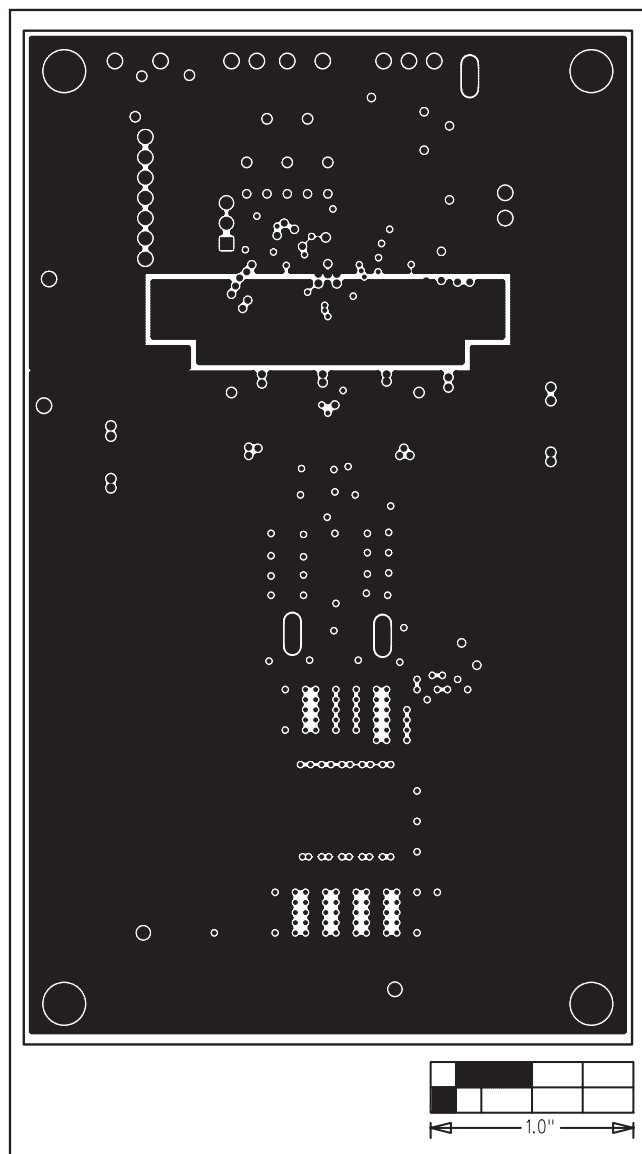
MAX17021 EV Kit PCB Layout—Internal Layer 2 (VBATT/PGND Plane)
